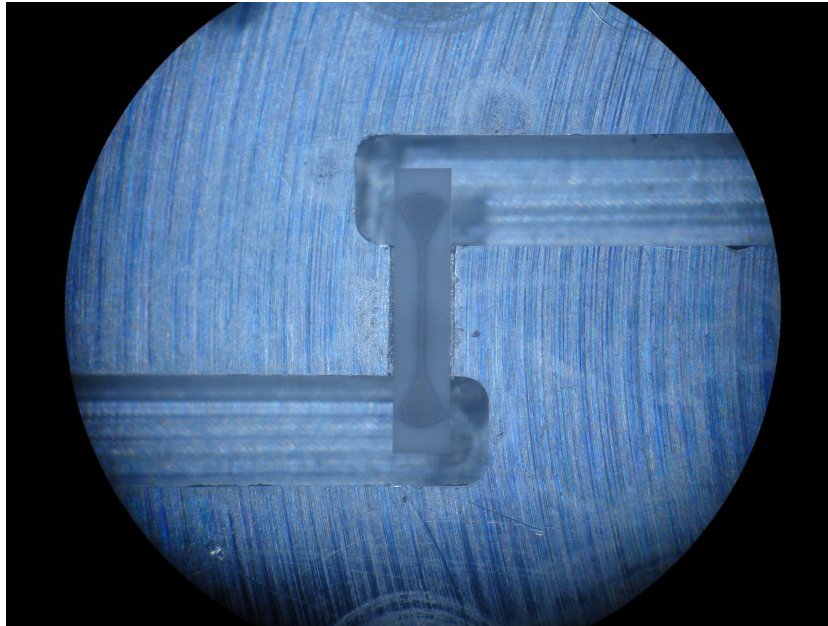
Assembled machined V-band waveguide-to-microstrip-to-waveguide test structure. The waveguide is WR-15 and made of Al.
